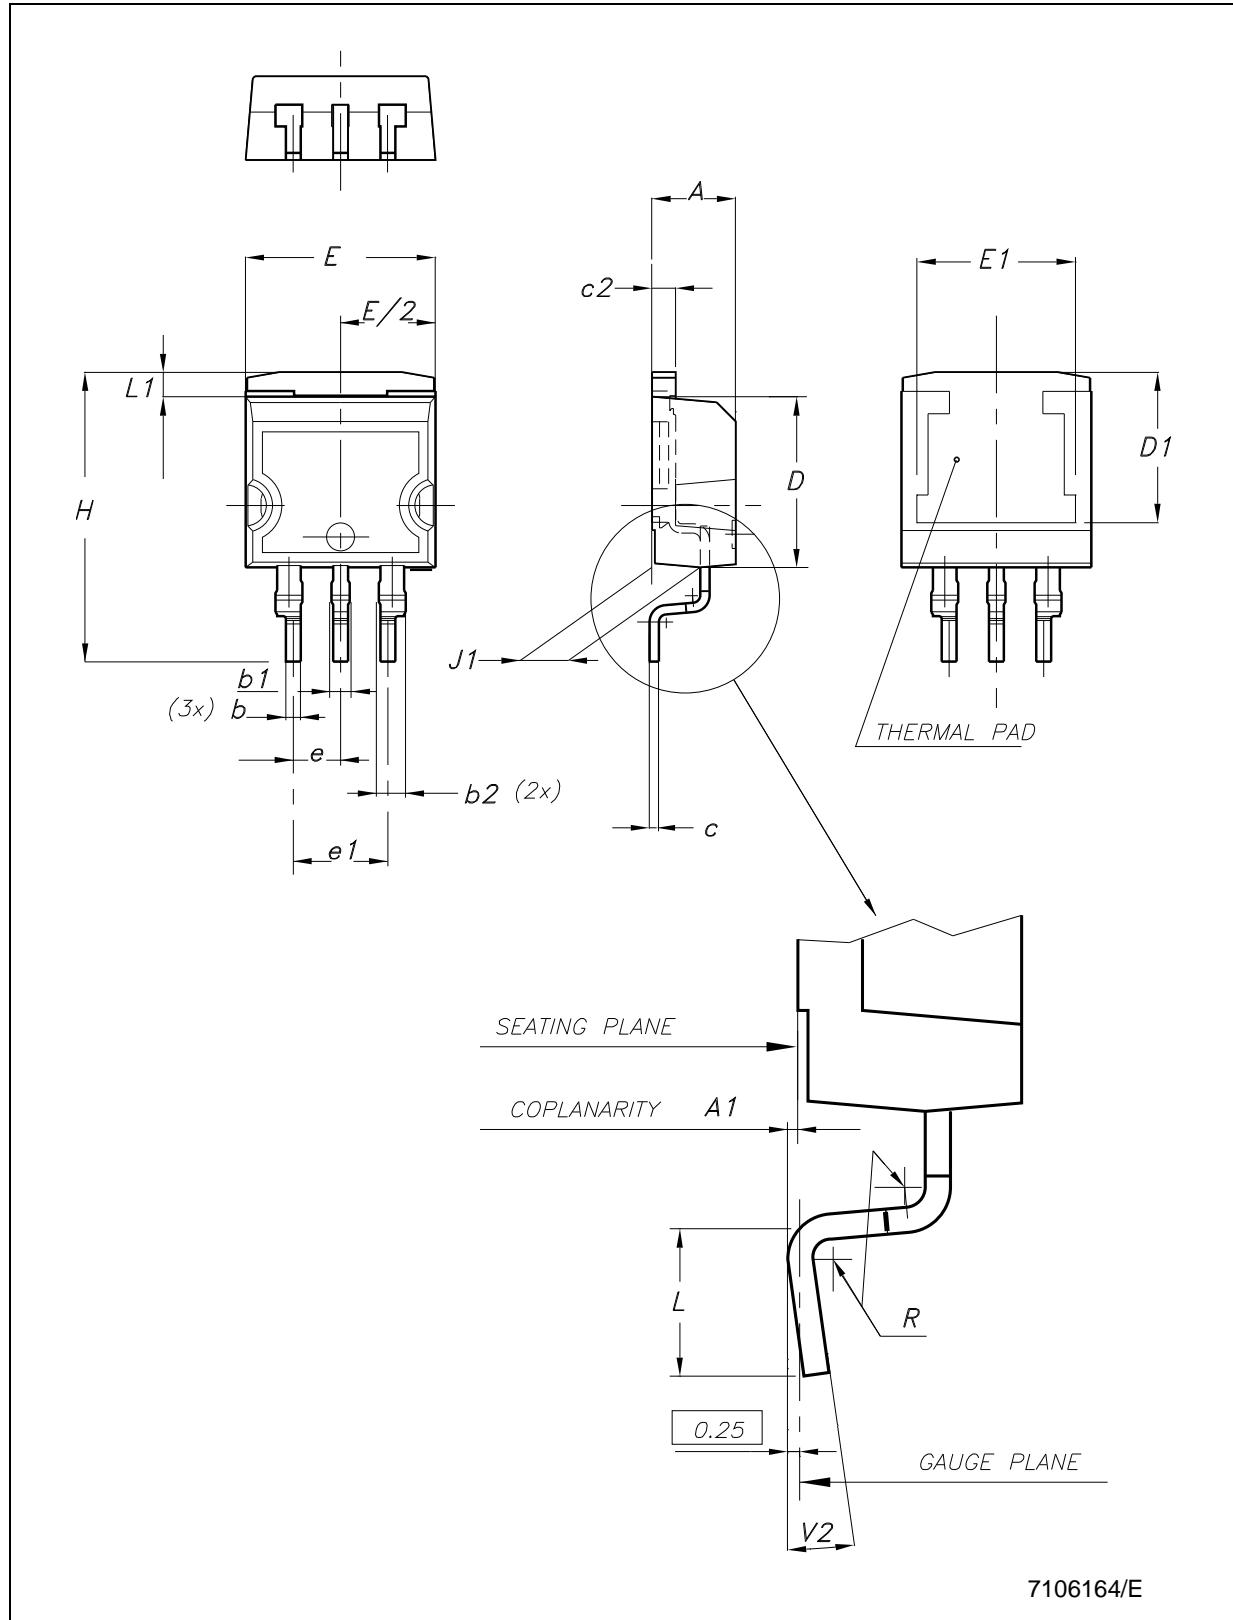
Drawing dimension D²PAK/A (type STD-ST)
